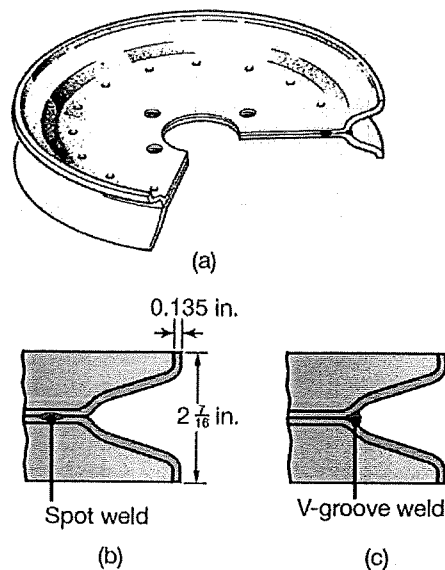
(a) Metal piece, (b) Spot weld and (c) V-groove weld
